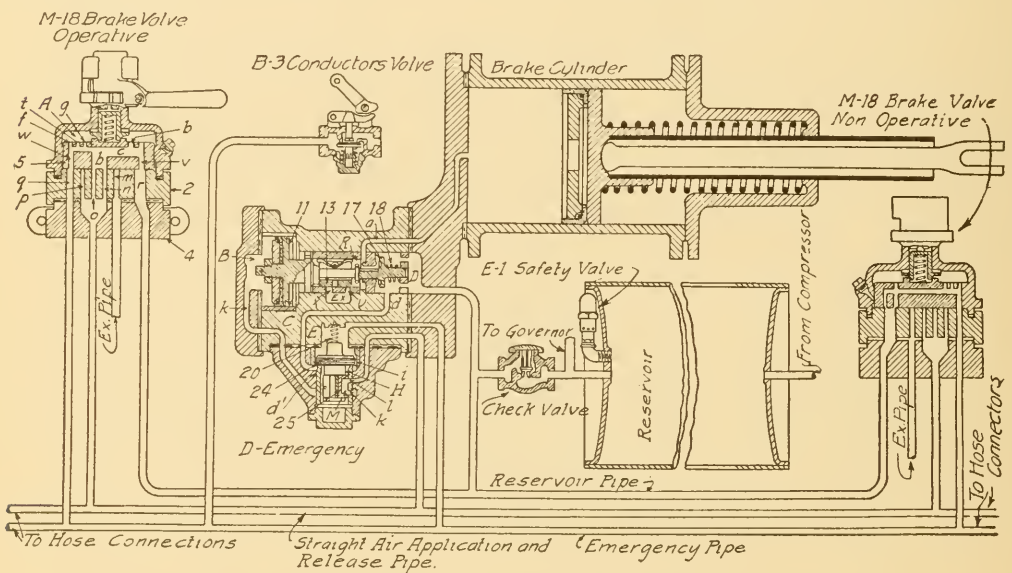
Diagram of Emergency Position, "SME" Equipment with Type "D" Emergency Valve (Westinghouse)
